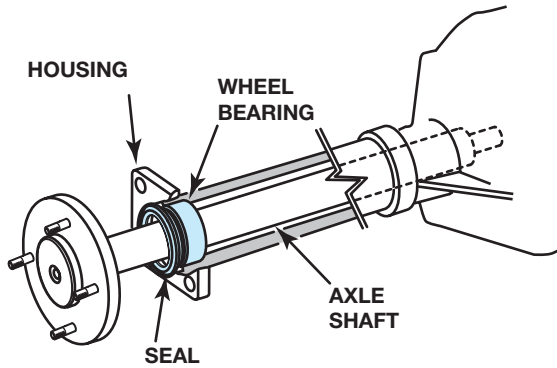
The axle seal is just inside the end of the housing and the bearing is inside it.
